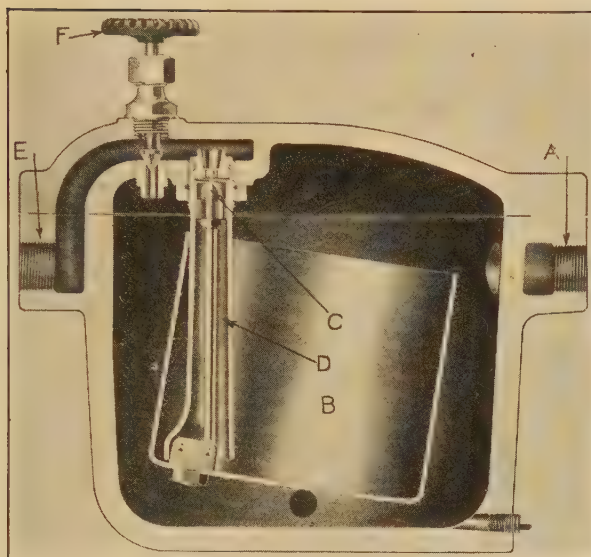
A bucket steam trap. (Courtesy, Crane Co.)
